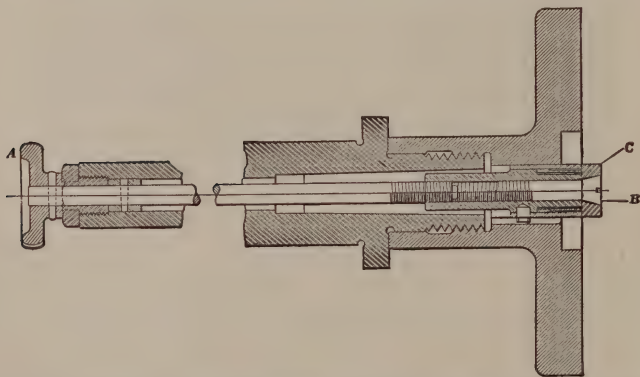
Section through headstock spindle (Brown & Sharpe), showing mechanism which operates face chuck. This chuck holds such work as thin cutters, saws, washers, etc. by means of an expansion bushing *C* which is expanded by the screw *B* and drawn tightly against the face plate by turning the knob *A*. Different sizes of bushings may be quickly substituted.
